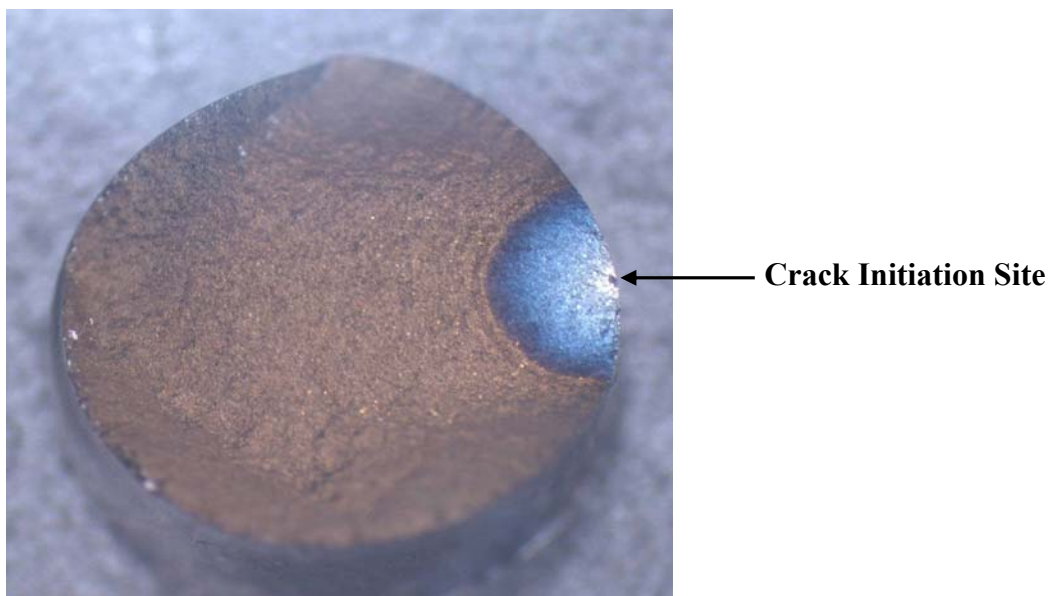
Low magnification image of the fracture surface of specimen UD1-S12 tested at 1050 MPa and 650°C.
